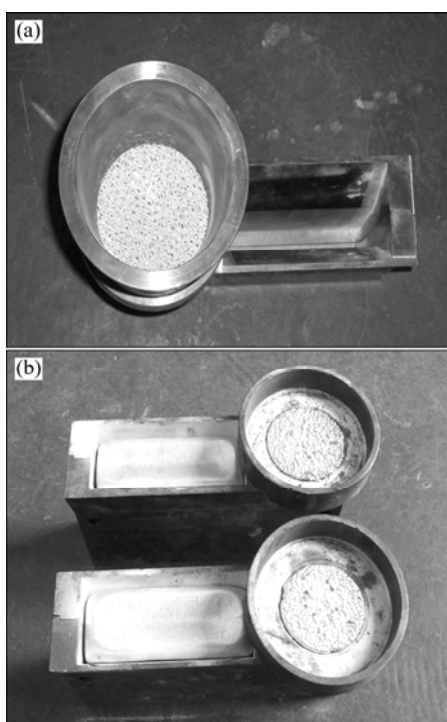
Photos of experimental casting mould: (a) Before casting; (b) After casting
